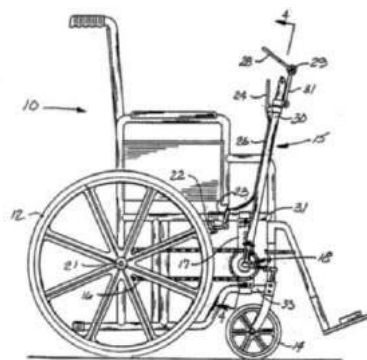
Gear and chain mechanism (Source: Theory, M., 2018)
